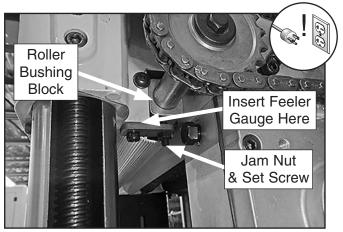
Example of feeler gauge location for adjusting infeed roller height when using wood blocks (one of two locations shown).
